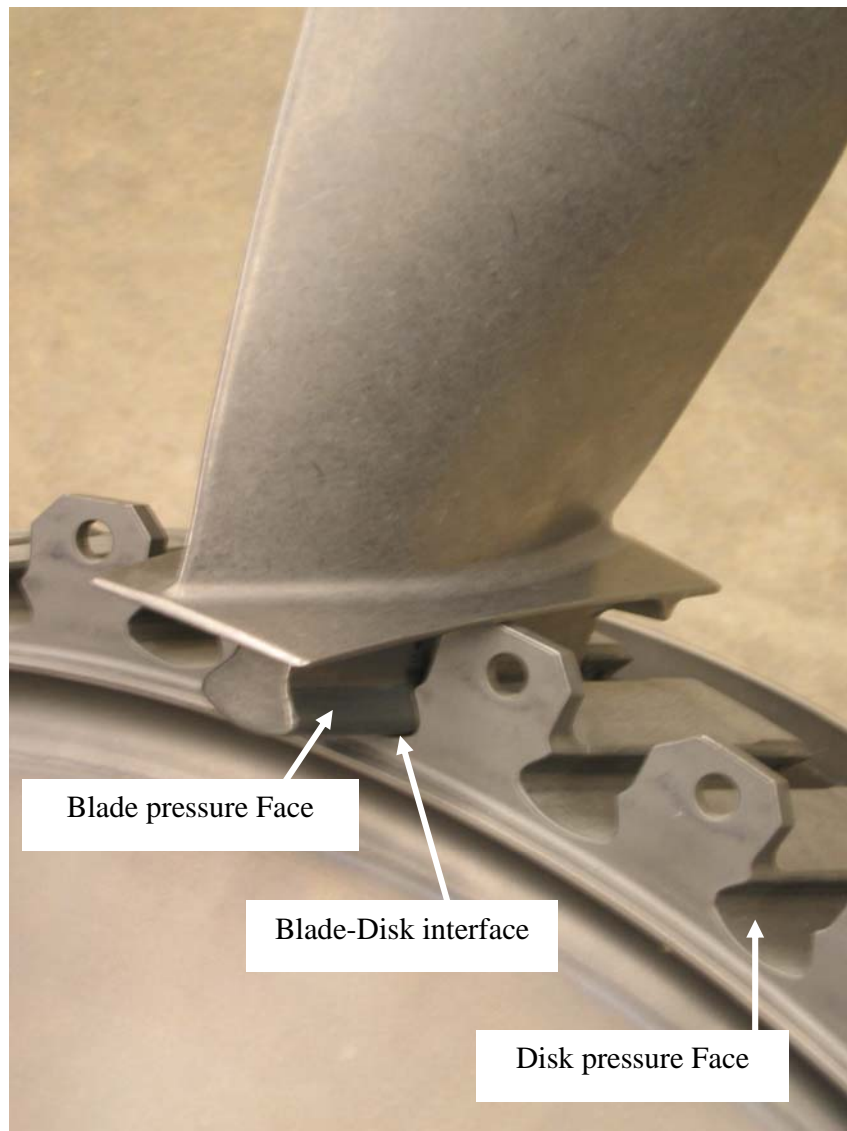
Blade/disc dovetail joint of a turbine engine.
